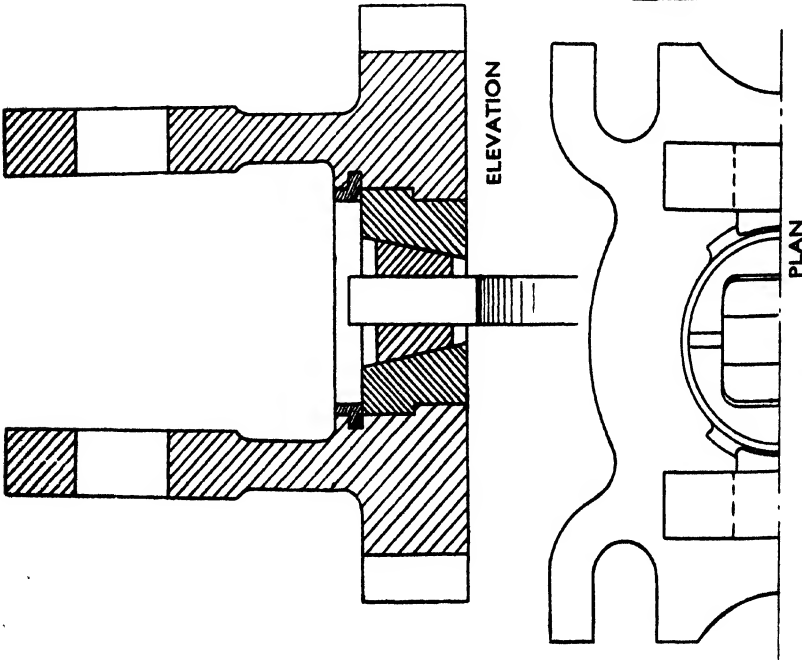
TESTING MACHINE HINGED SHACKLES WITH WEDGE GRIPS
